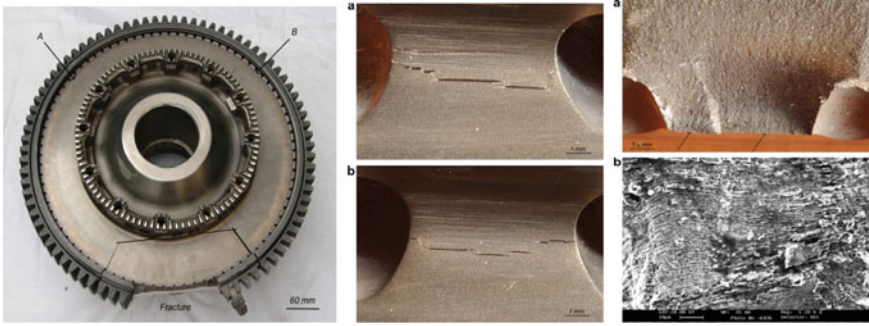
Fatigue failure related to surface topography (Source [40])
